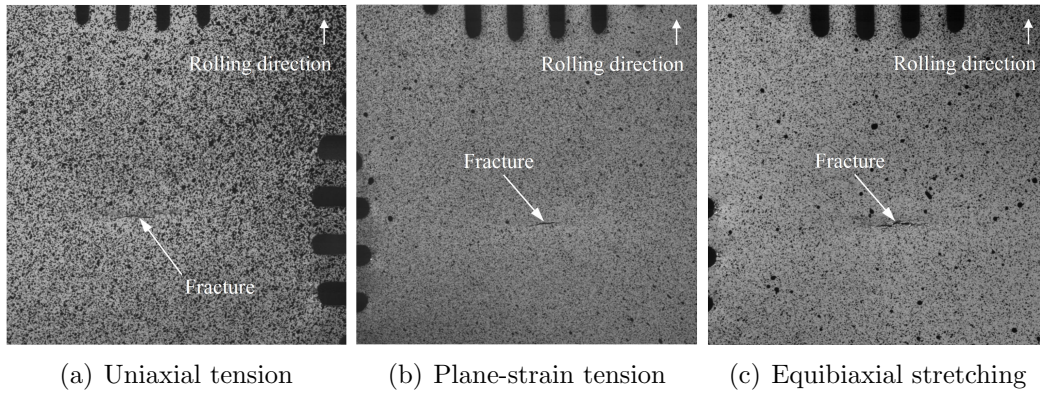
Fractures of cruciform specimen under different linear strain paths
